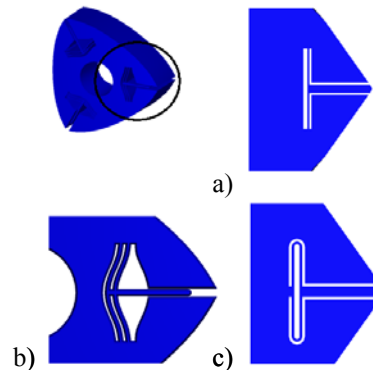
Rotary engine rotor with details for apex seal flexure designs: (a) single flexure, (b) bistable flexure, and (c) folded flexure.
